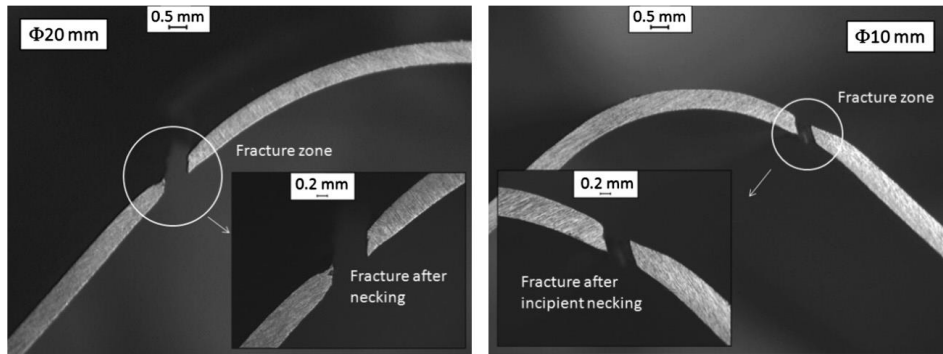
Fractography of the failure zone in stretch-bending using a cylindrical punch of 20 mm (left) and 10 mm (right) diameter, respectively.
